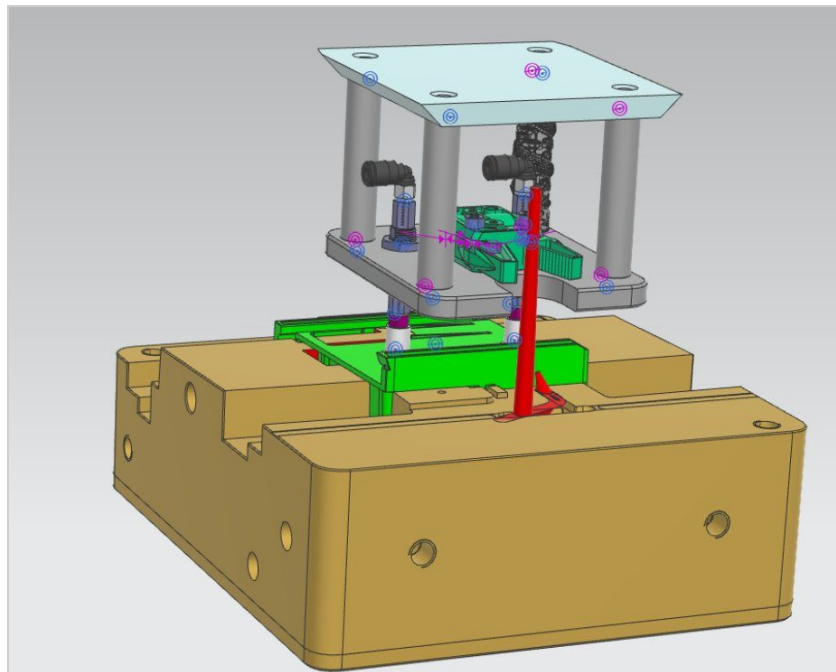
Tooling for the second product, with a center pin and a flexible pneumatic line.
